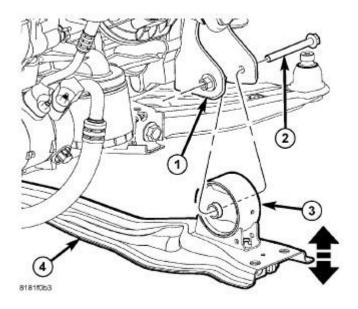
Fore/Aft Crossmember, Engine Roll Mount & Through Bolt Courtesy of CHRYSLER GROUP, LLC
